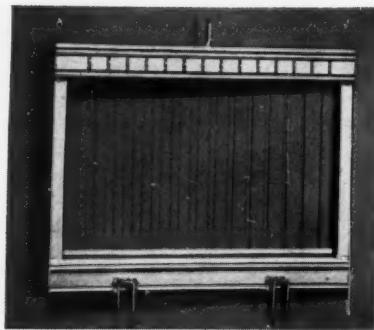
Reciprocating knife frames are the principal parts of bread slicer. This is the Oliver arc-welded steel frame assembled
